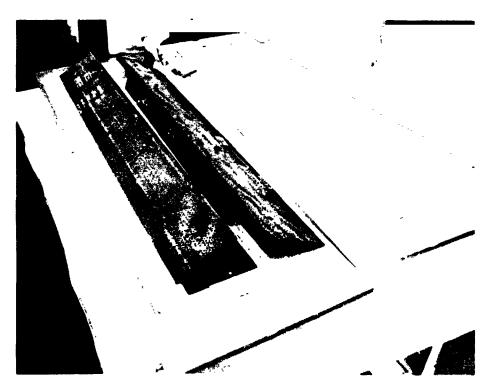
Spar Lug (Test No. 12), Showing Peel Ply Being Removed from Completed Detail Halves
